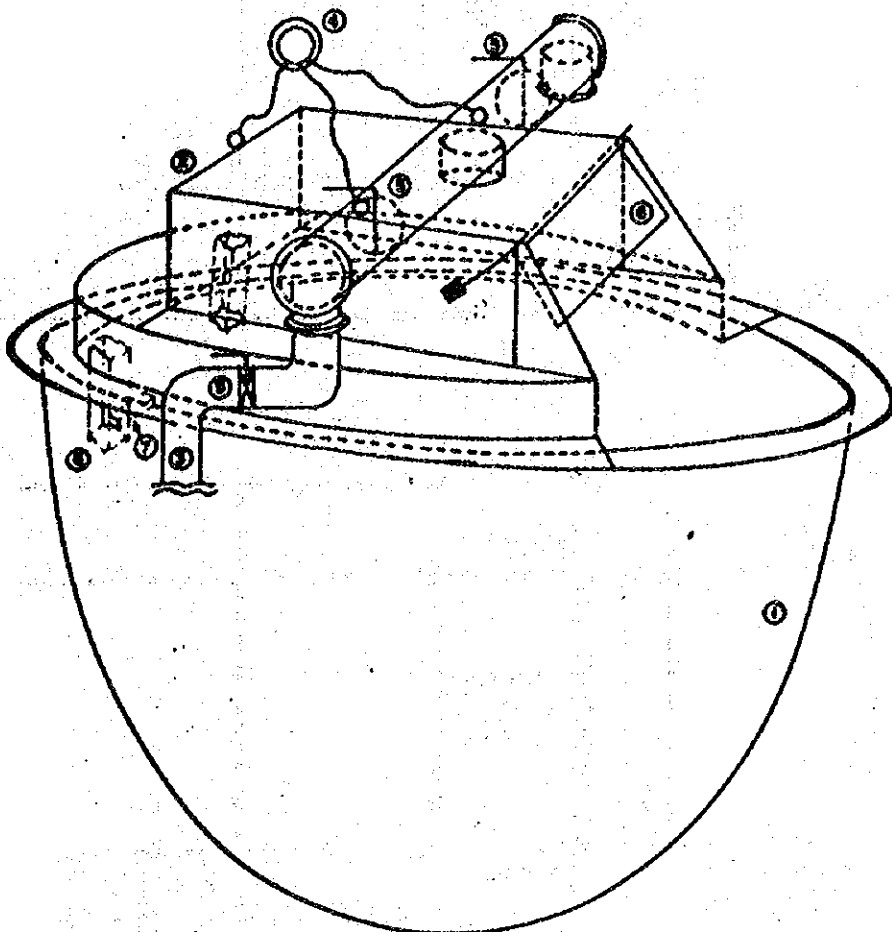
FIGURE OF SIDE HOOD ON EQUIPMENT
